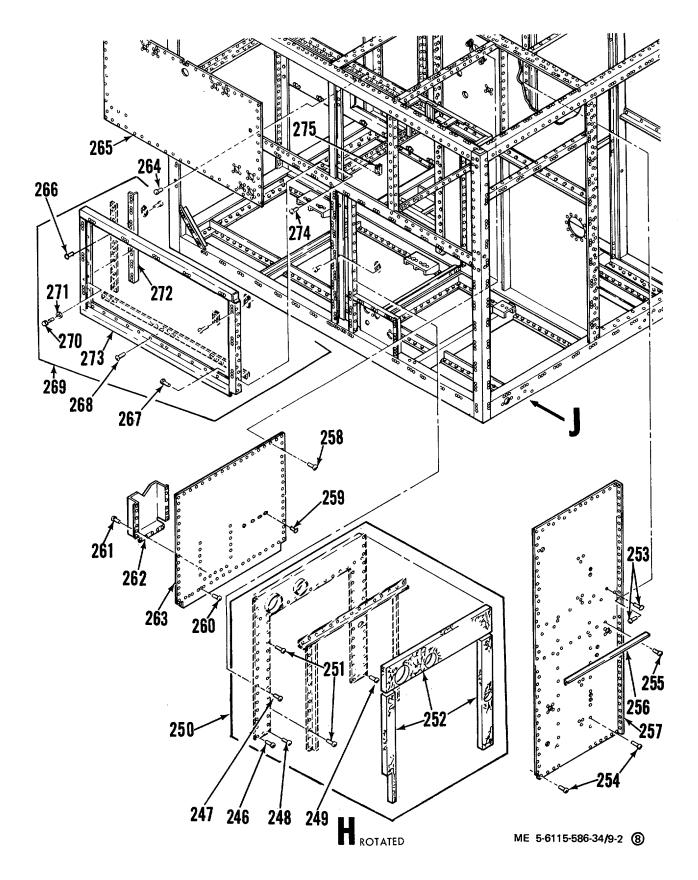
Shell assembly, exploded view. (sheet 8 of 9)
